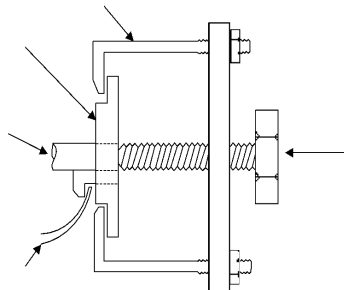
Motor coupling pinion or pulley withdrawal tool.
